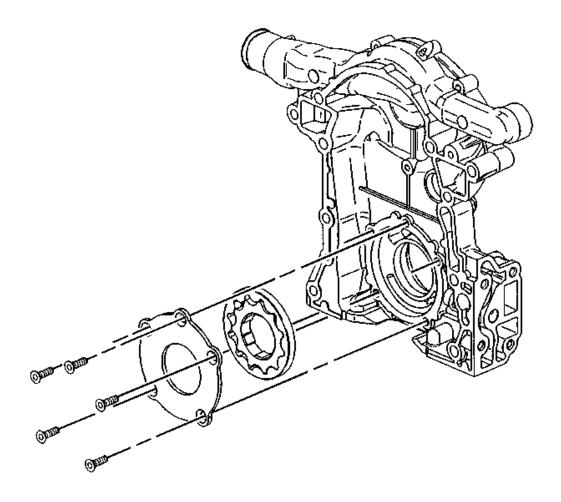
Identifying Oil Pump Cover & Gear Set Courtesy of GENERAL MOTORS CORP.
